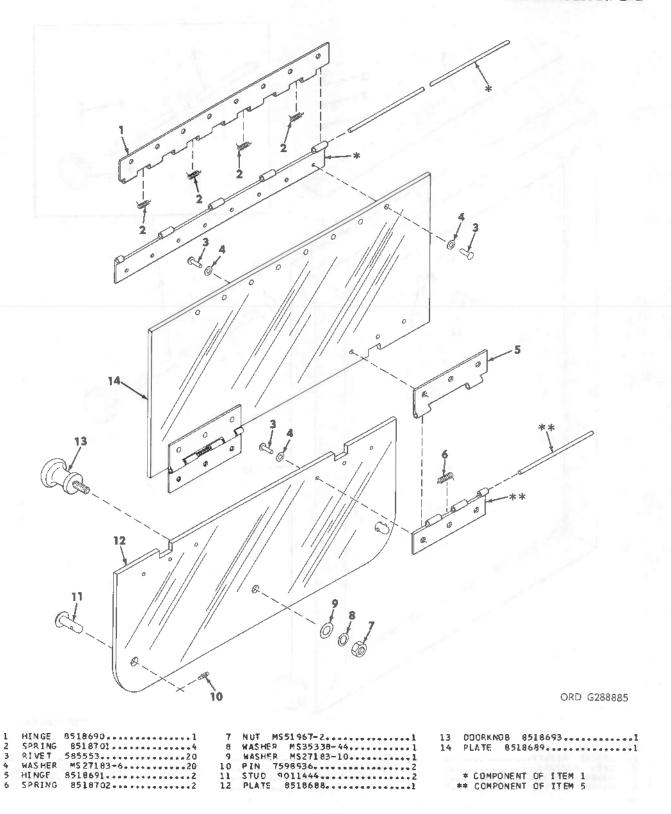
DOOR, PLASTIC FOLDING /8518692/-EXPLODED VIEW /SEE FIGURE 229 FOR NEXT HIGHER ASSEMBLY/
